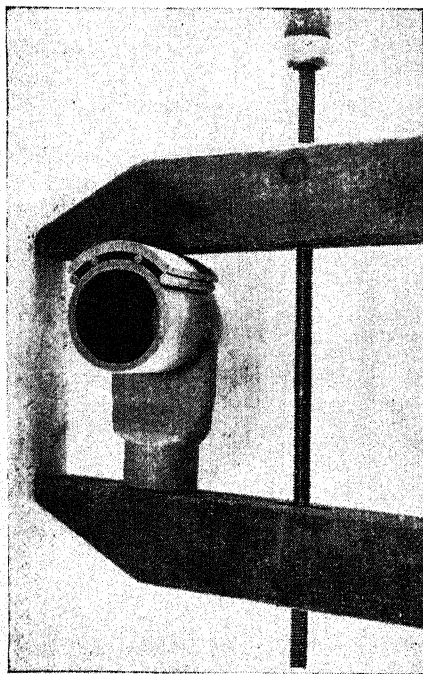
Inlet and exhaust ducts clamped in position ready to be welded to cylinder.
